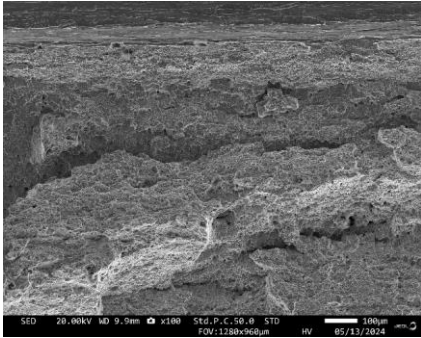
FBB-M1 near fracture surface, ductile, dimple structure.
